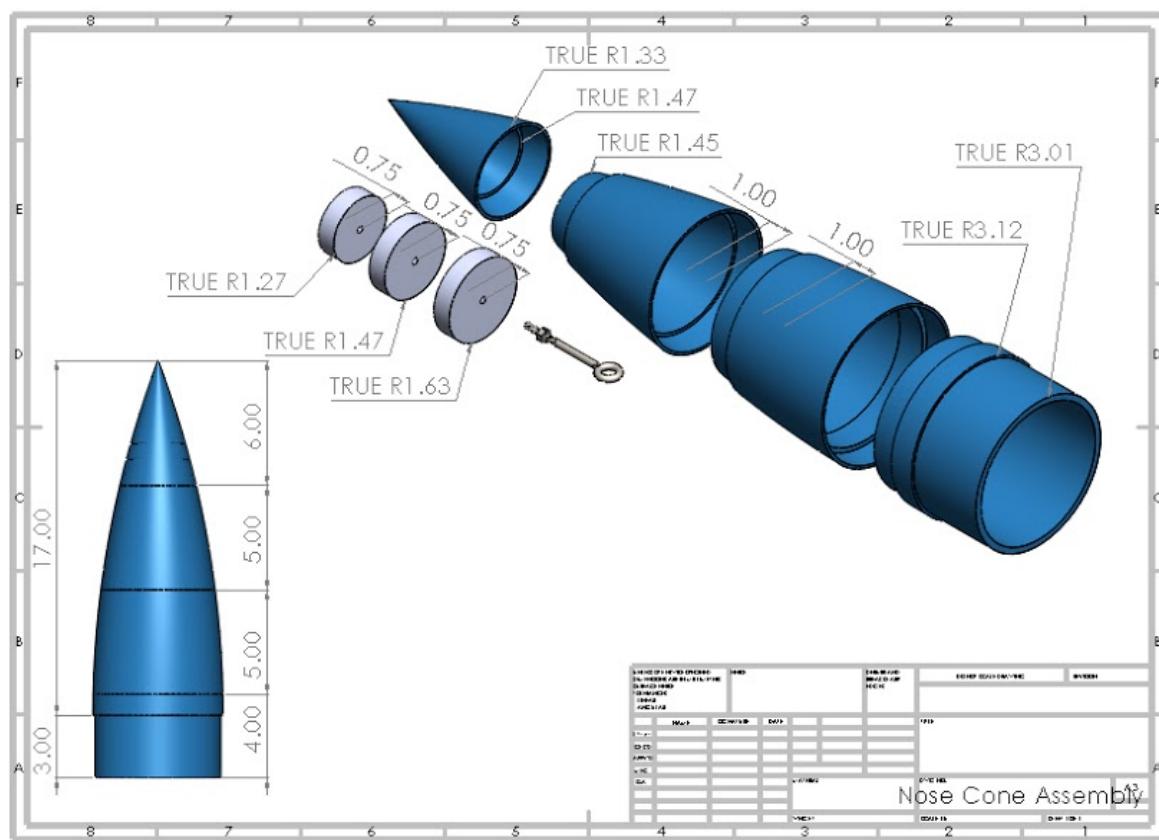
Exploded Dimensional Drawing of Nose Cone Components
